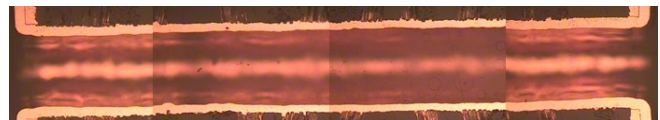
Cross Section of 0.50 mm Through Hole in 1.6 mm Panel Plated at 10 ASF
